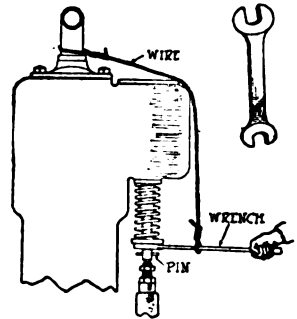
Another method of releasing spring tension to remove pin or washer on end of valve with use of a flat wrench.
